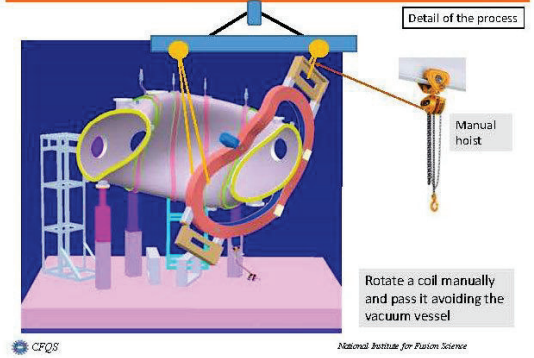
shows the pre-assembly process of the modular coils and the vacuum vessel. In step 1, the vacuum vessel part is fixed with appropriate jigs on the workbench desirable to be composed of a surface plate which is a flat plate used as the main horizontal reference plane for precision inspection. The coil is inserted while rotating it in steps 2, 3, 4 and 5, but since the vacuum vessel has a complicated twisted shape, delicate adjustment work is required to move the coil. It is possible to develop a special transport machine for that work, but to reduce costs, it is also possible to work with an overhead crane and the manual hoist as shown in the figure. Since it is necessary to frequently attach and detach the legs of the vacuum vessel to pass the coil, a jig such as a hydraulic jack will be prepared to facilitate the work. In step 6, the whole is fixed to the upper temporary base and suspended by an overhead crane.
